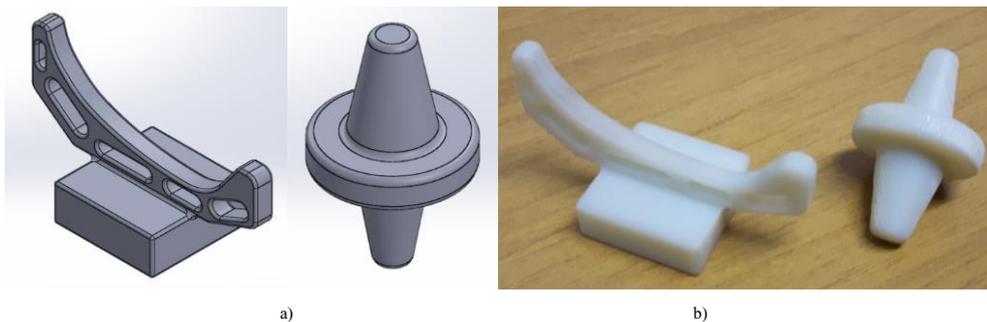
First version of fixture: a) CAD model, b) 3D printed fixture
